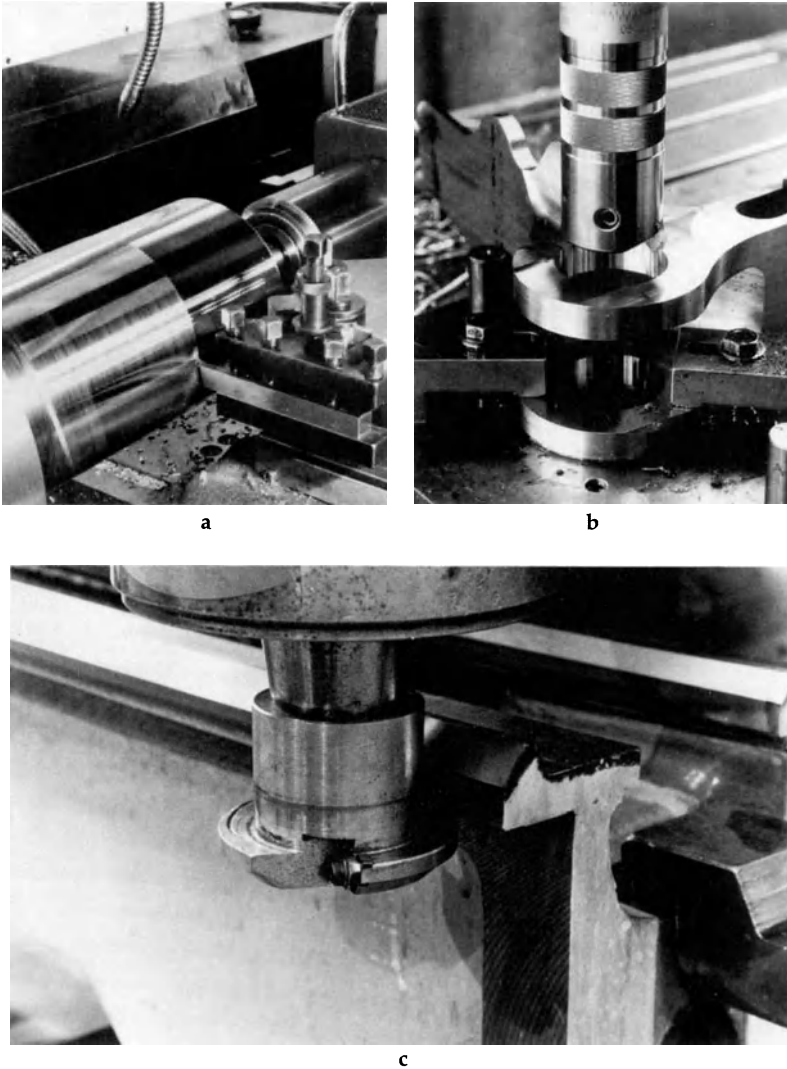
Machining applications are many and varied using ultra-hard cutting tool materials like PCD and CBN. a PCD turning copper printing rolls. b PCD boring alloy engine support struts. c CBN fly-cutting induction hardened cast iron lathe beds. [Courtesy of Debeers PLC.]
